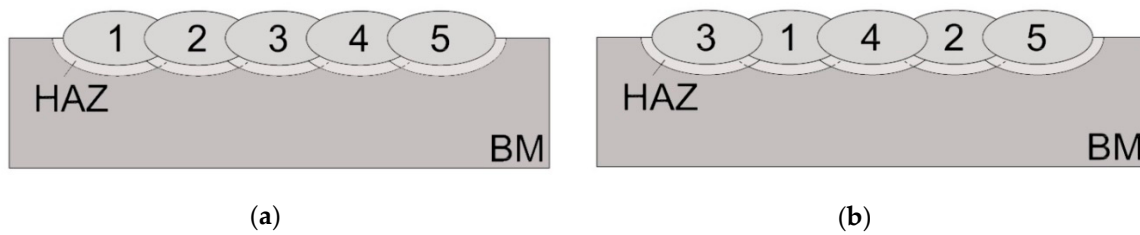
Scheme of welding process in (a) specimen S1 and (b) specimen S2.
